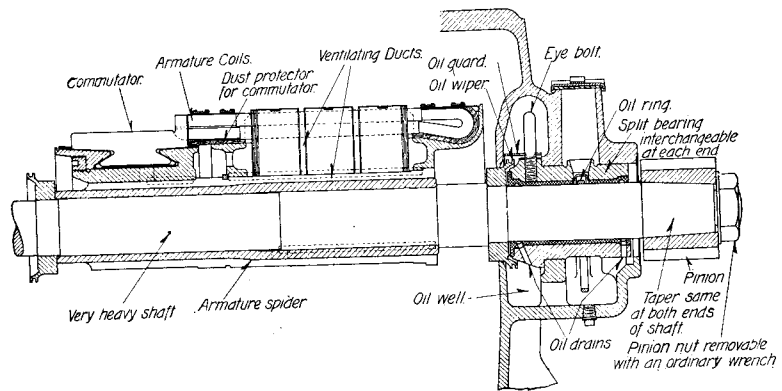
CROSS-SECTION OF ARMATURE AND BEARING
